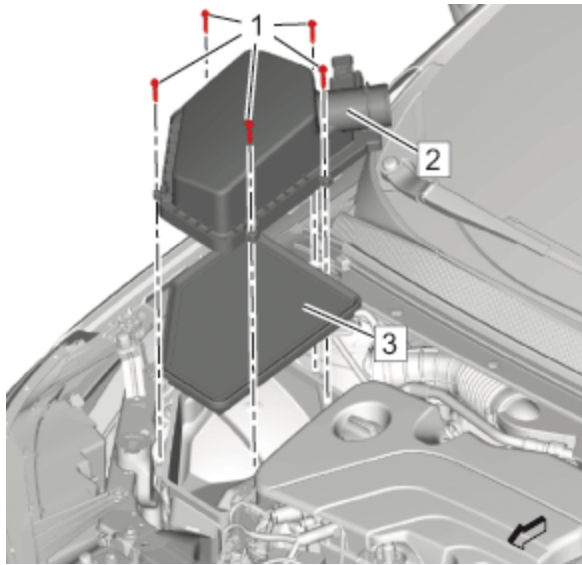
Air Cleaner Upper Housing, Air Cleaner Element And Bolt
